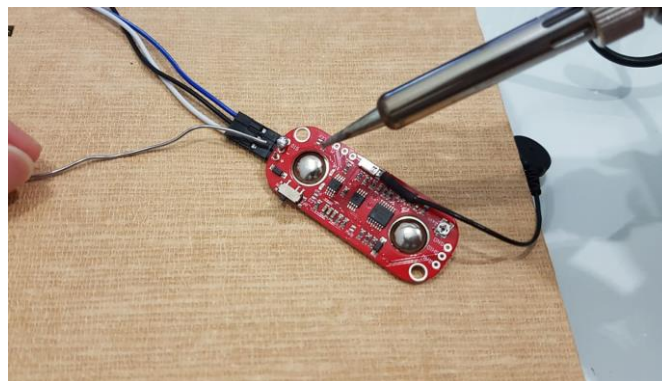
Soldering of Iron onto L-type Header for Adherence.
